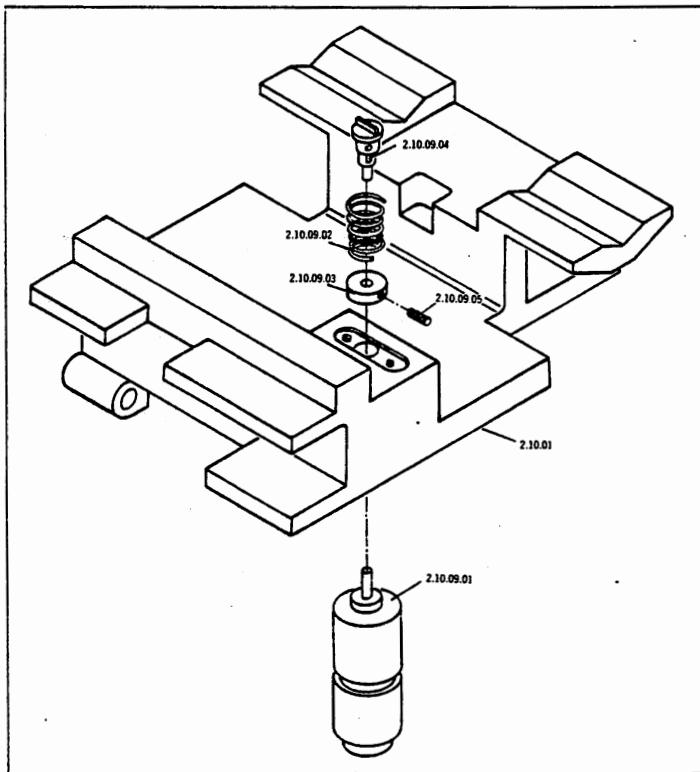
Ribbon Drive/Carriage Assembly
